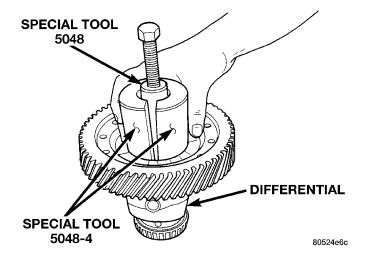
Position Tool 5048 Over Button and Collets at Differential Bearing
